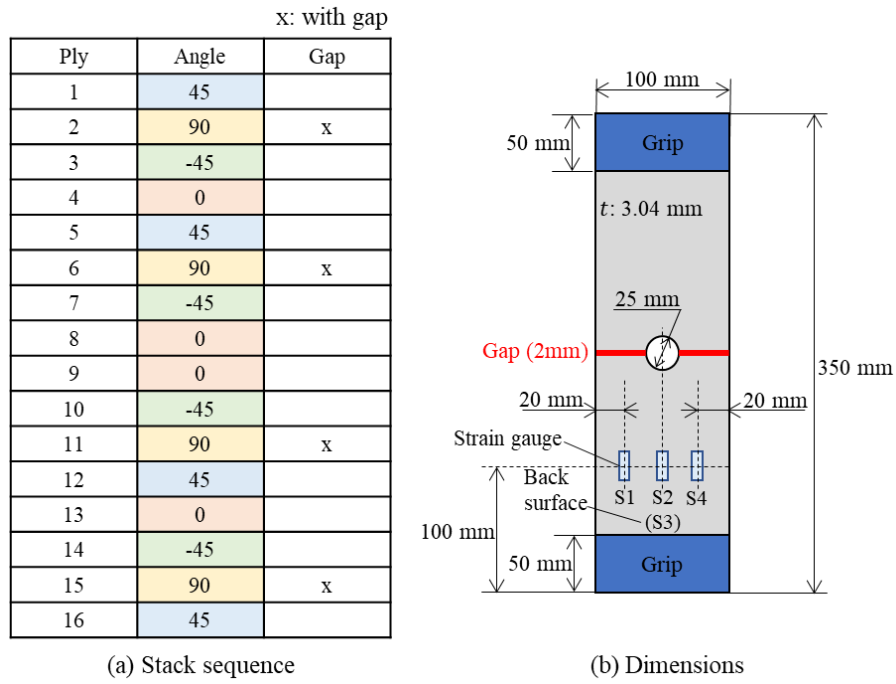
(a) Stacking sequence and (b) dimensions of the open hole tensile test specimen.
